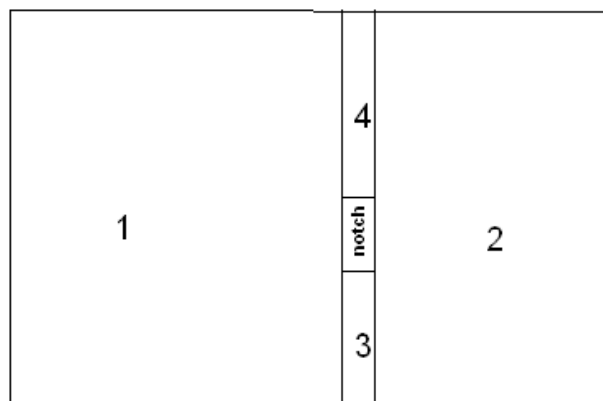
Four assembled blocks surrounding the through-thickness notch in the aluminium plate.
